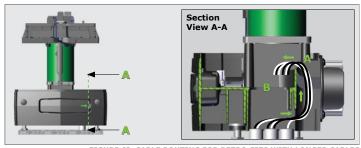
CABLE ROUTING FOR RETRO-FITS WITH LONGER CABLES
